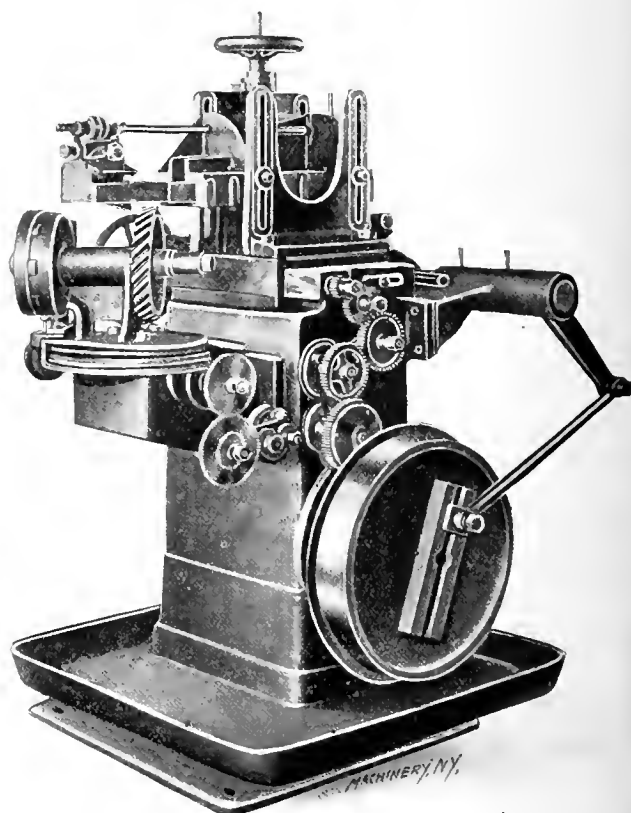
The Bilgram Machine for Cutting Helical Gears, operating on the Principle of Fig. 94.
